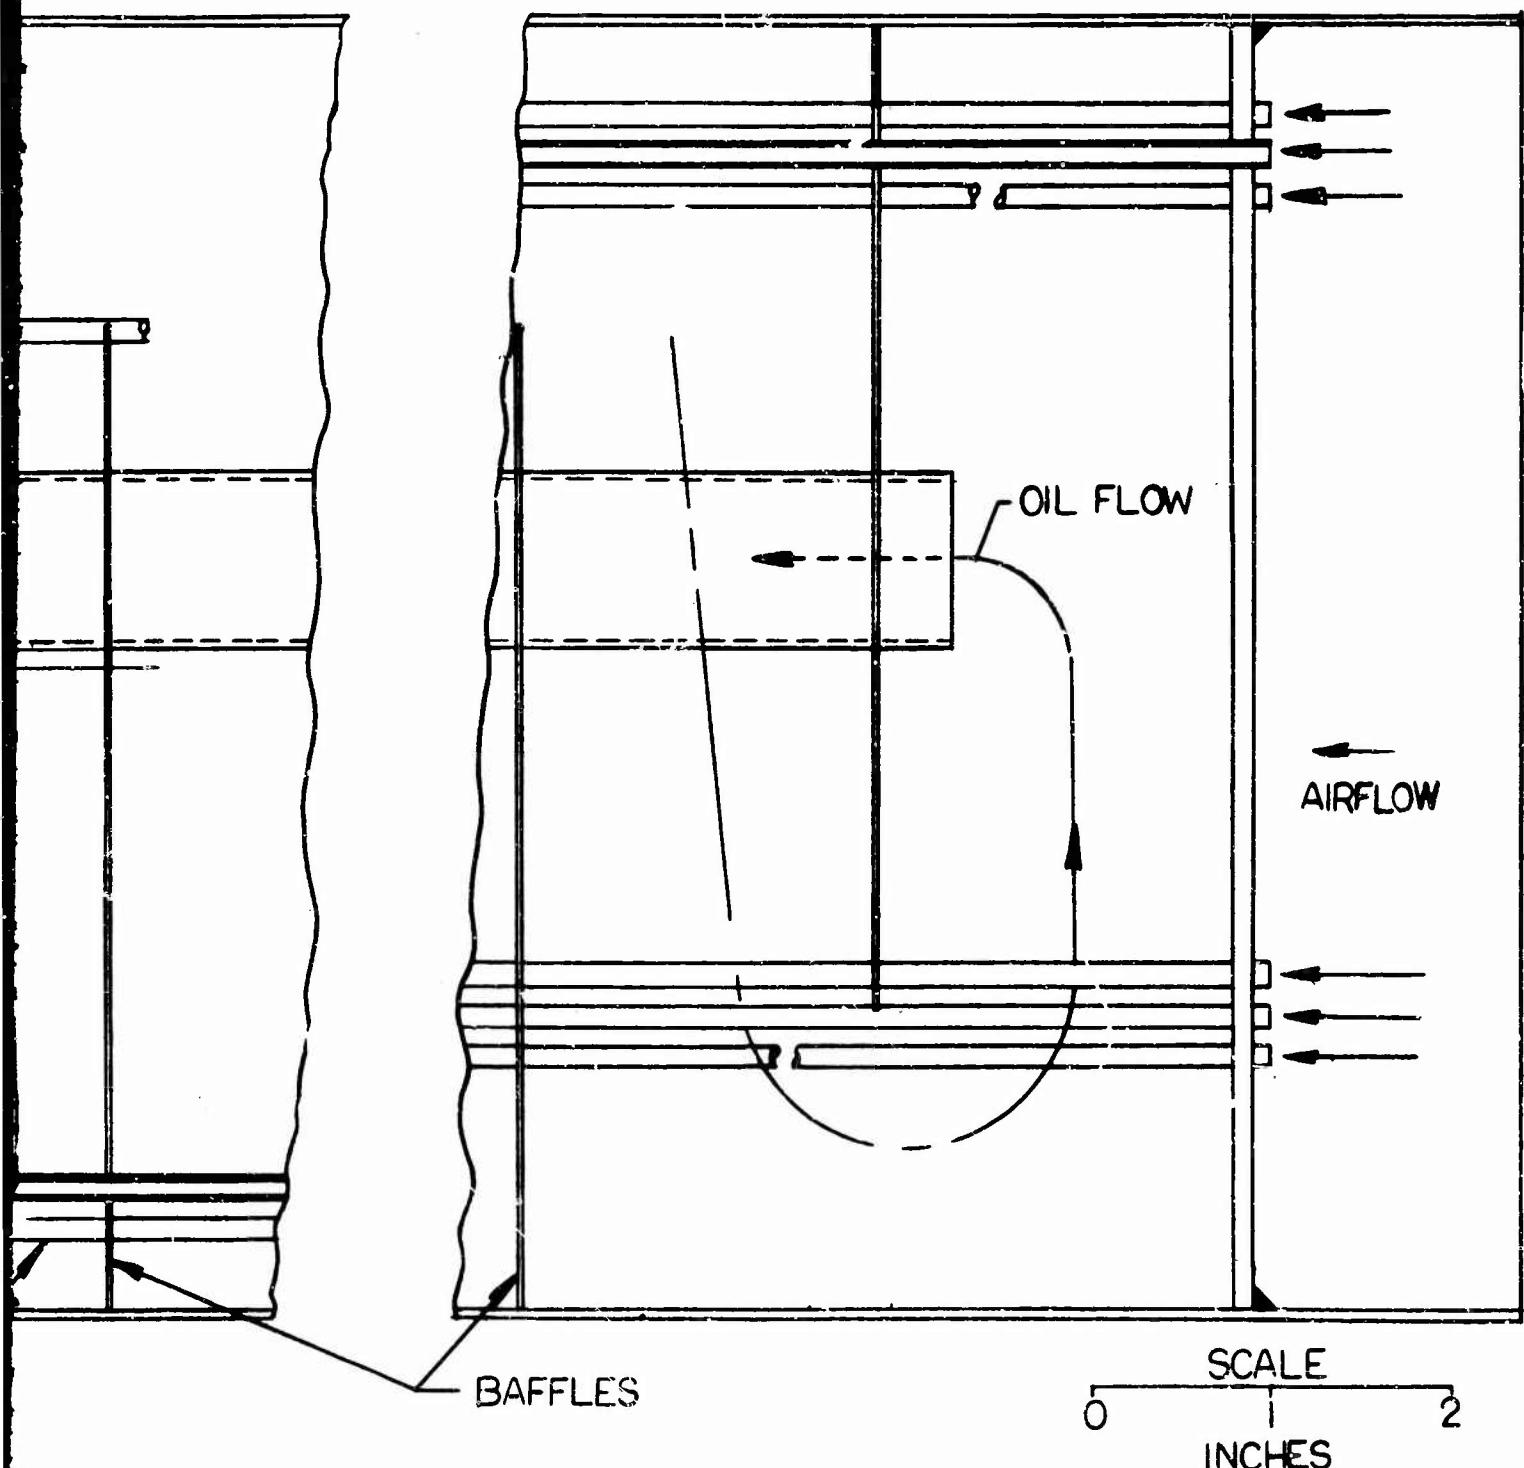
CH-54A Rotor Shaft Heat Exchanger.
